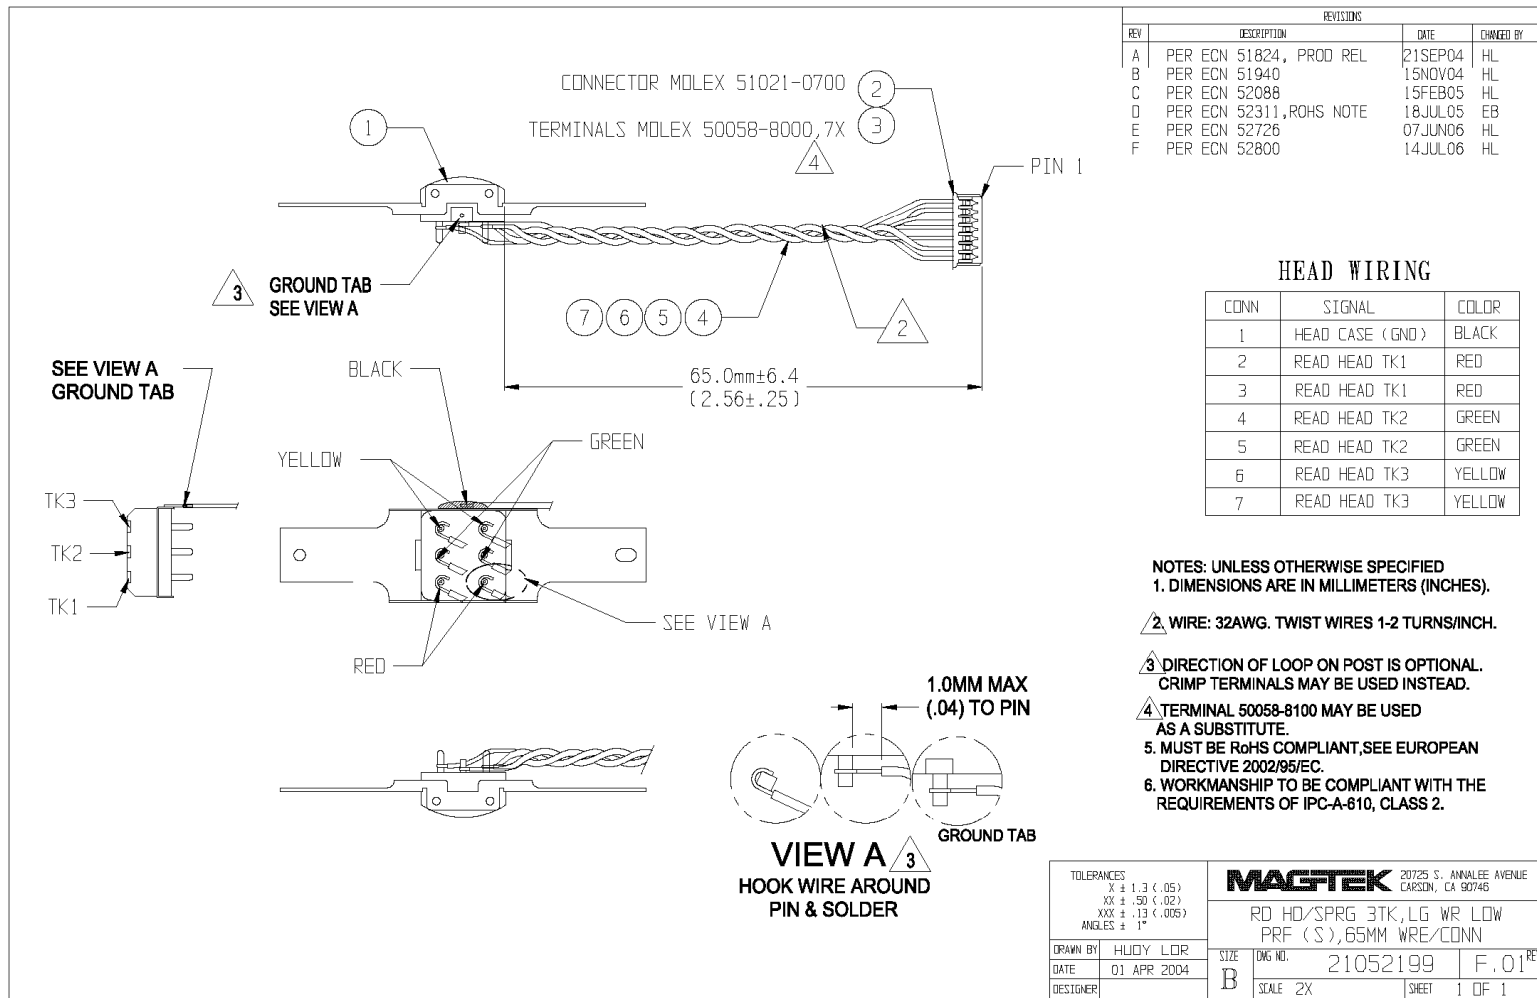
3-Track Read Head Assembly with Cable and 7-Pin Connector
